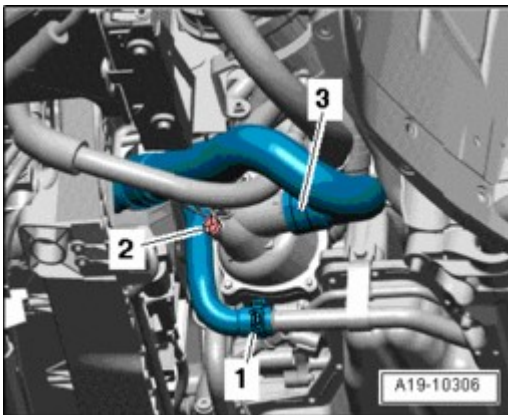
Removing Drain Plug At Coolant Thermostat Housing & Coolant Hoses
